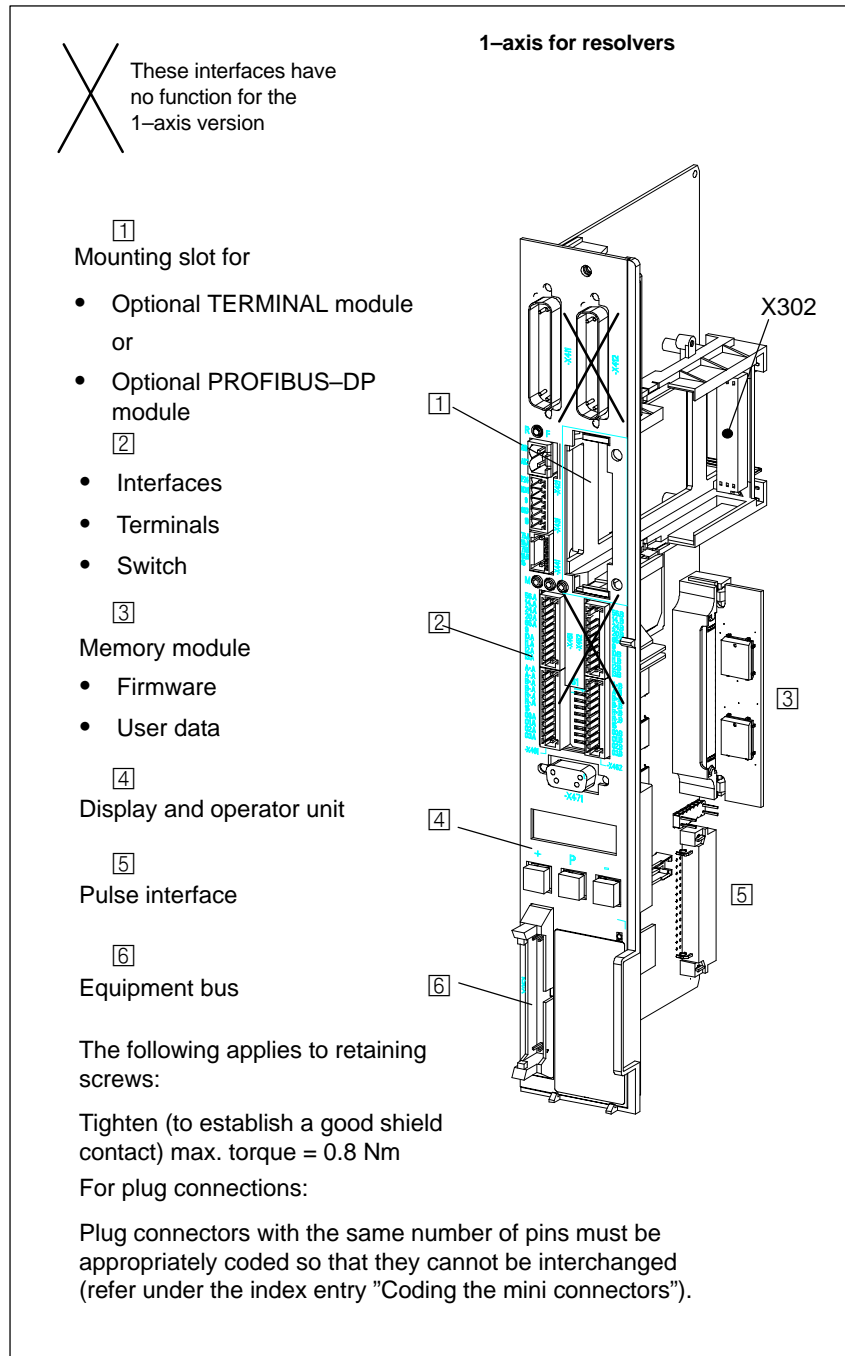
Control board for 1 axis (SIMODRIVE 611 universal HRS)
